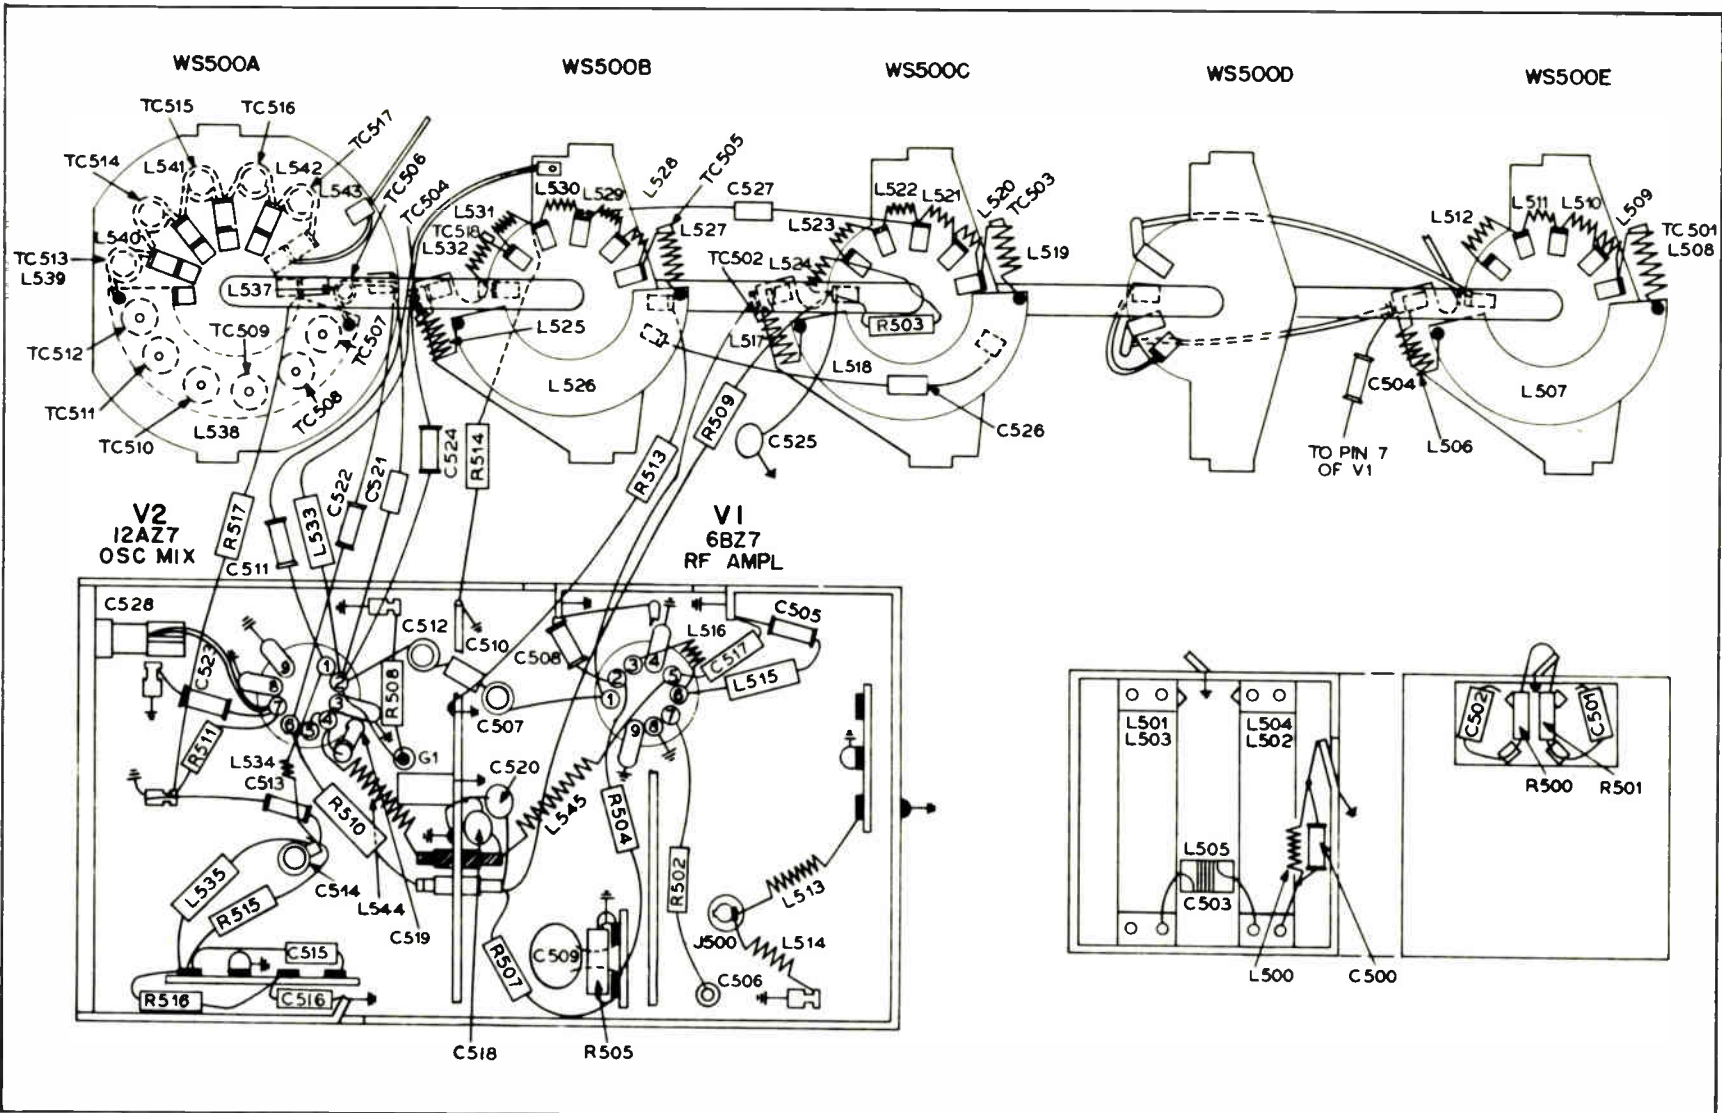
Television Tuner, Part No. 76-7600-3, Base Layout
